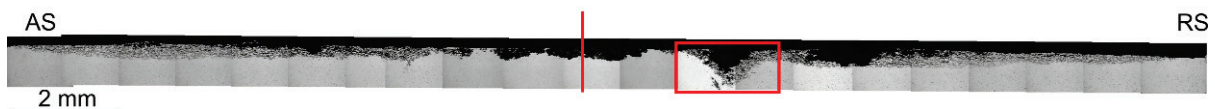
Intergranular corrosion attack of the weld nugget, TMAZ and HAZ on both sides of the FSW 2024-T3 face side coupon after 24h immersion in an aqueous chloride-peroxide solution. One millimeter of the specimen surface was removed by milling to eliminate the fine grained material. The (red) line indicates the center of the weld nugget.
